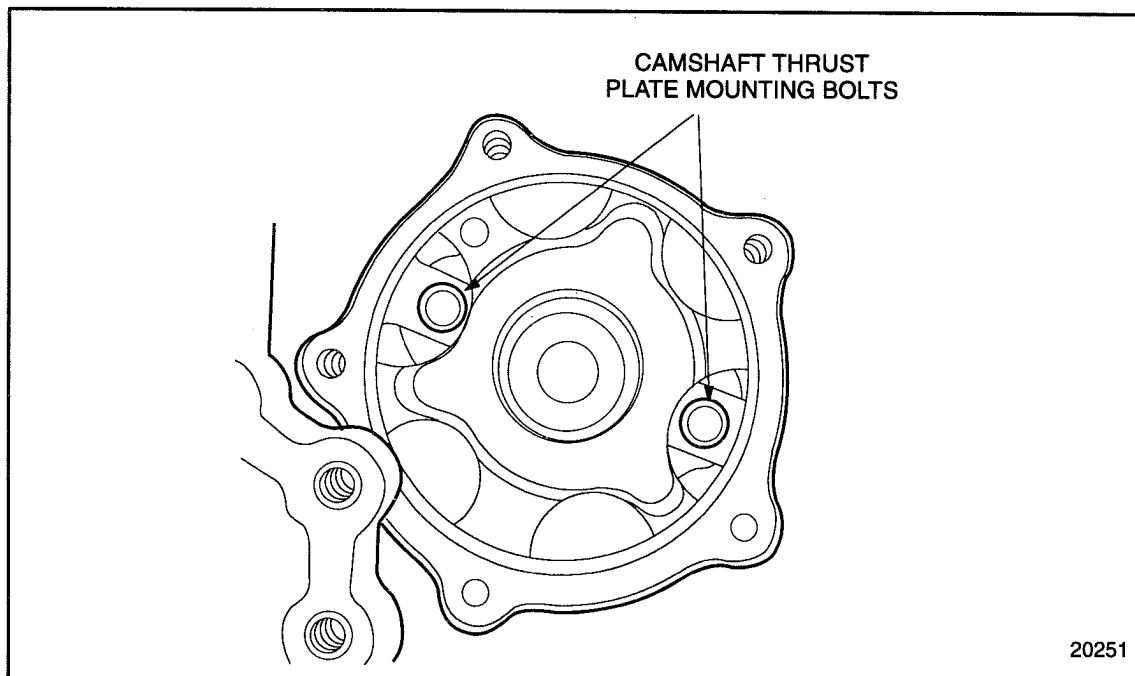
Camshaft Thrust Plate Retaining Bolts
